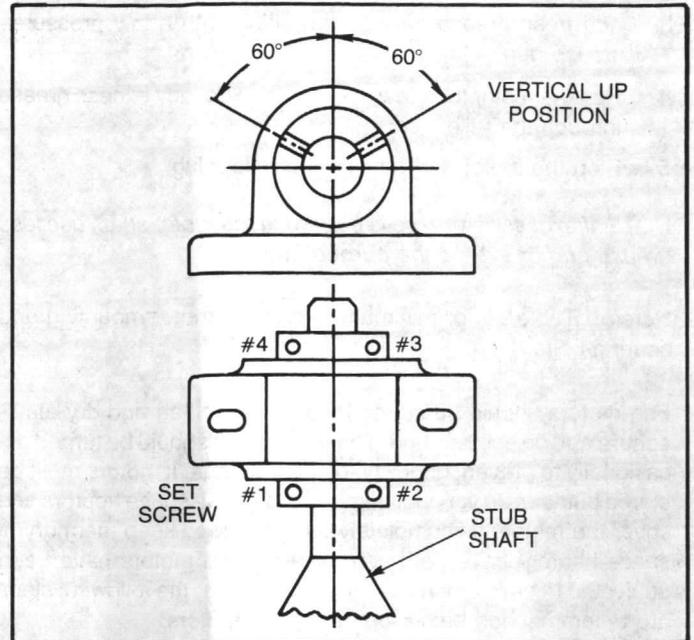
Instruction Sketch for Pillow Block Bearing with Double Lock Setscrew
